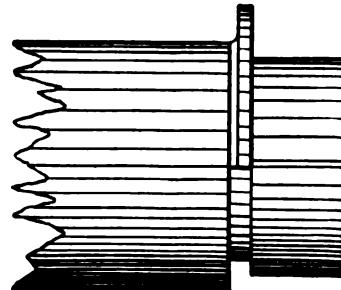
Diagram Showing Recess for Flanges in Pipe Pattern
